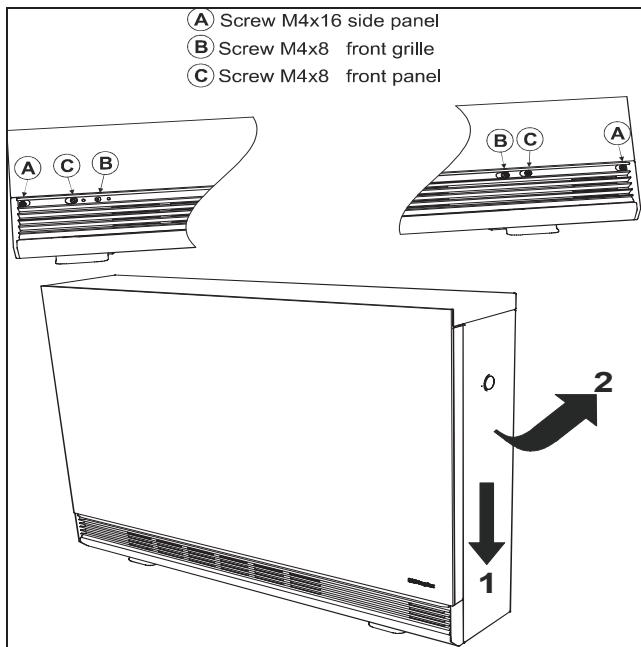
Remove the screws from both side panels (A). Slide the side panels downwards (1) and swing them out (2). After the side panels have been removed, unscrew the fixing screws (B) on the front grille and remove the front grille. Then unscrew the fixing screws (C) for the front panel.
